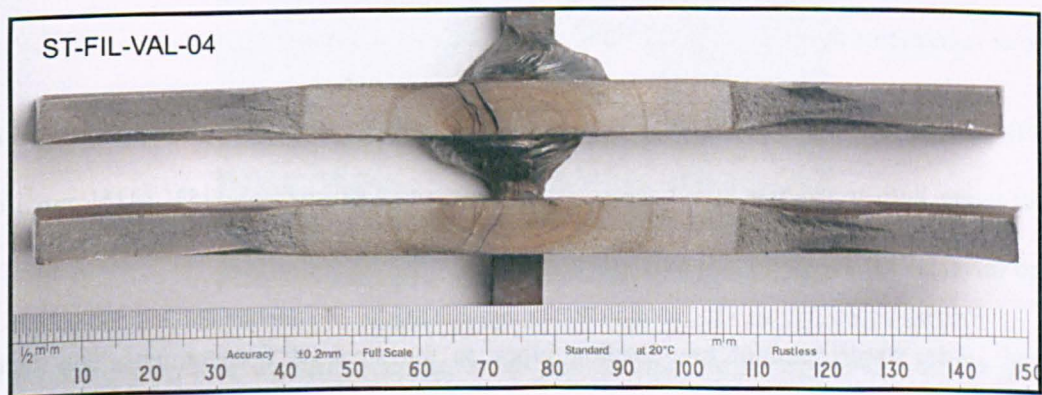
Fillet welded specimen fracture surface showing semi-elliptical beachmarks. An 8mm thick steel specimen is shown.
